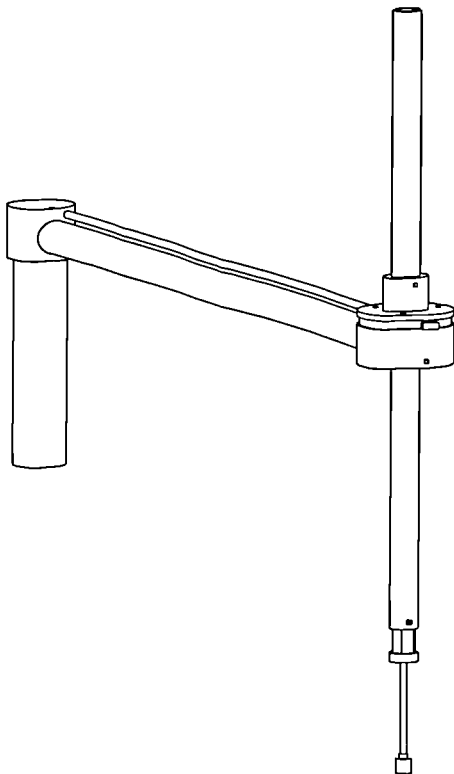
Experimental Handset EH4 (assembly drawing).
